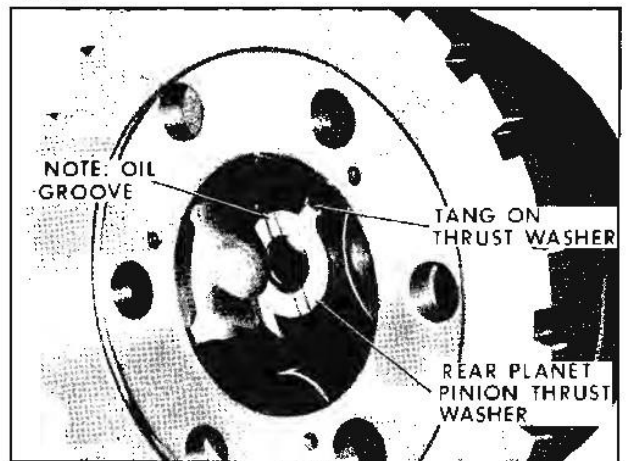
B-92 Installing Long Pinion Rear Thrust Washer
